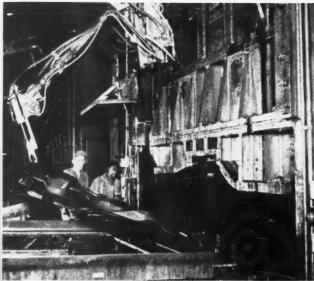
Employees at Ford Motor Com-pany's pressed steel building at the Rouge plant watch as an air - activated iron hand pulls a Ford floorpan from a huge press. Even as the finished stamping is removed from press, another steel blank is inserted, ready to be pressed. This is one of the many "automation" operations that the Ford Motor Company has recently installed in manufacturing operations.
